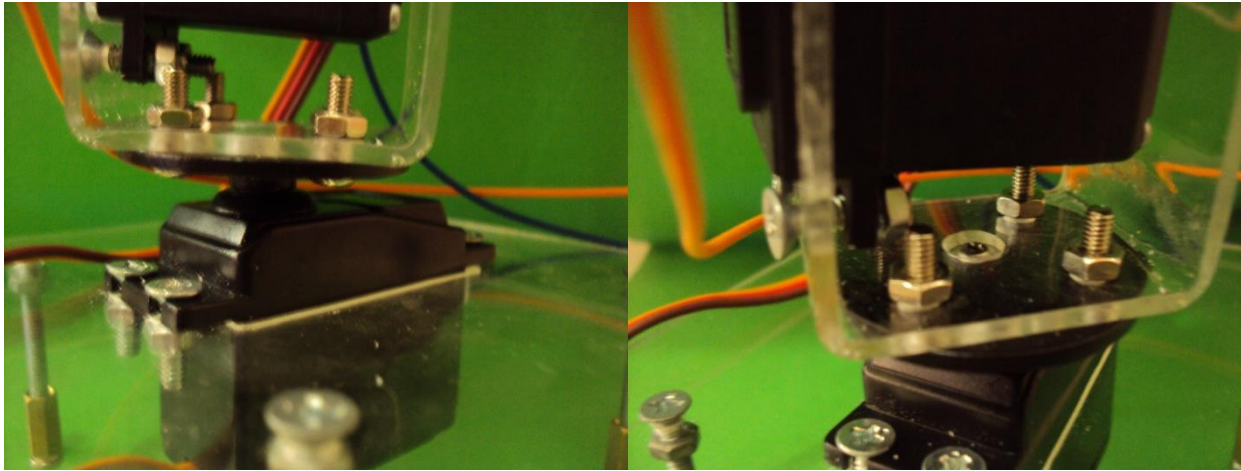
Assembly of bottom servo to bracket A of middle servo
